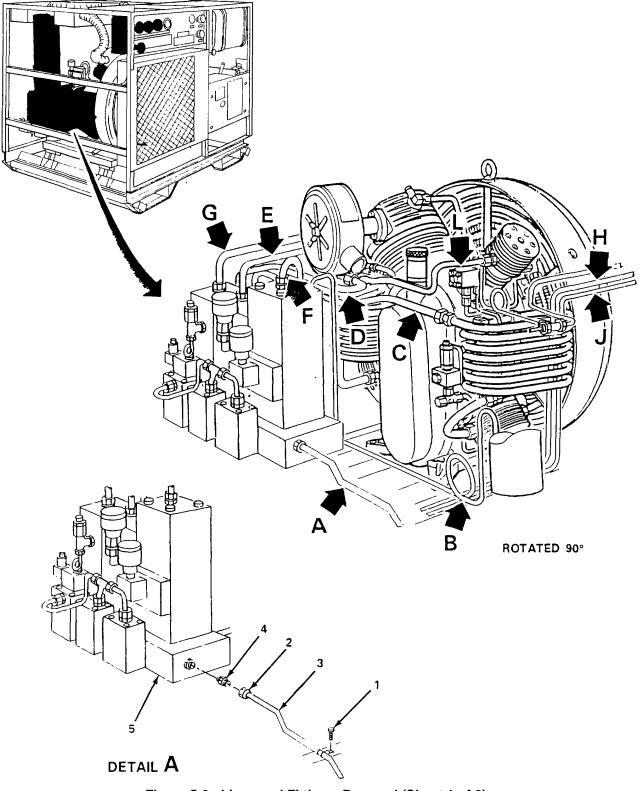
Lines and Fittings, Removal (Sheet 1 of 6).
